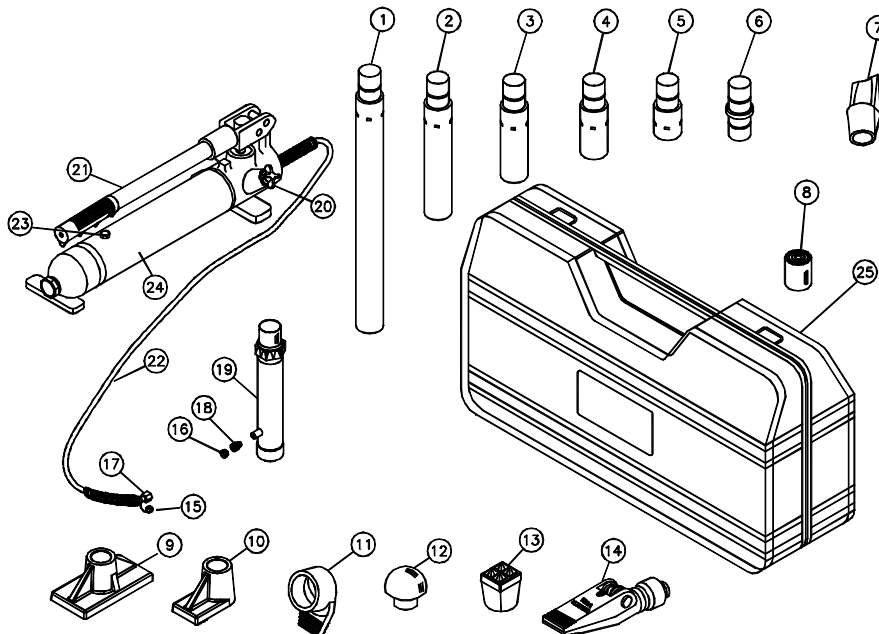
Replacement Parts Illustration for Model Atd-5800
